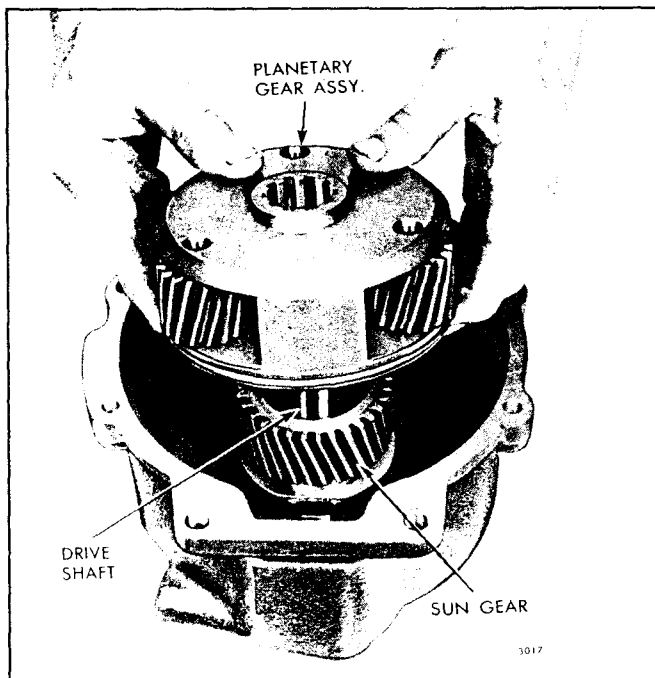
Removing or Installing Planetary Gear Assembly from/on Reduction Gear Drive Shaft (1.5:1 Ratio)
